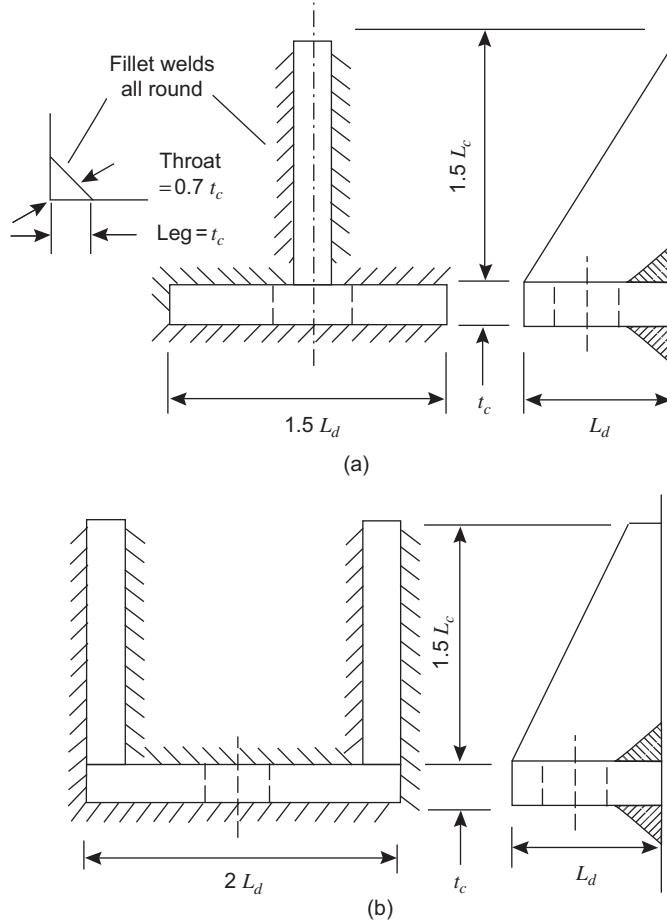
Bracket designs. (a) Single gusset plate. (b) Double gusset plate.
